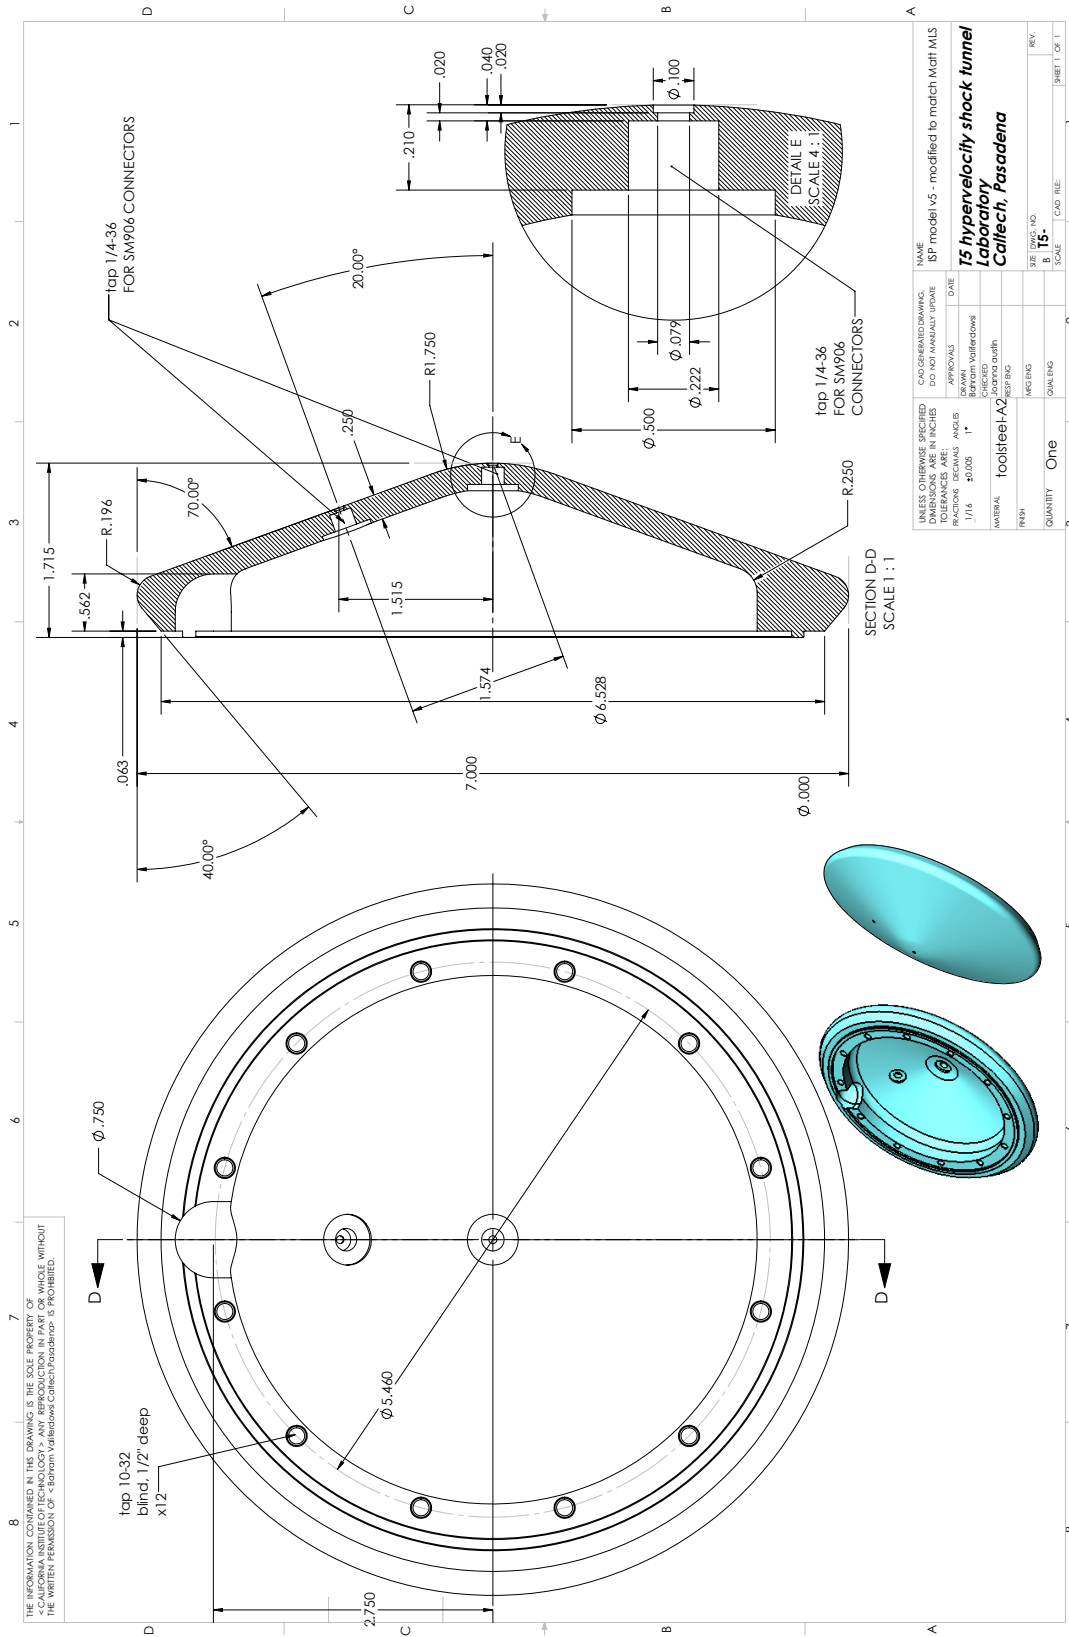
7" diameter MSL model forebody machine drawing with fiber port locations.
